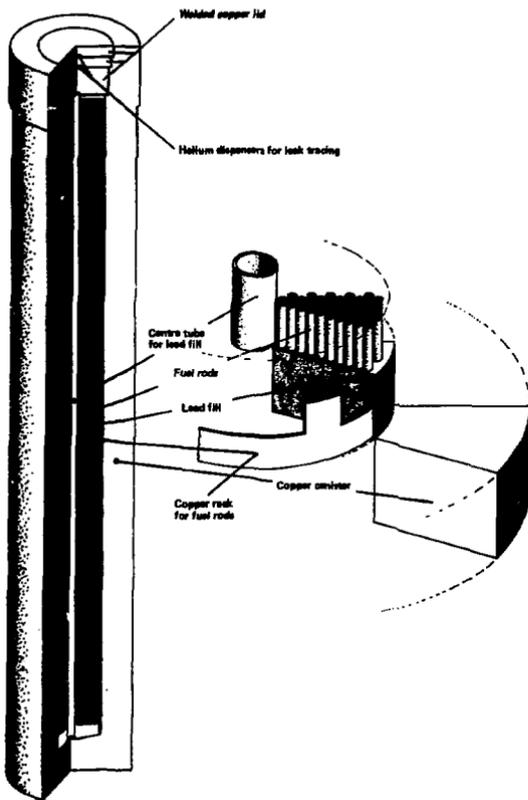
Cutaway drawing of copper canister filled with fuel rods. After dismantling of the fuel assemblies, the fuel rods are placed in a cylindrical rack whose perforated copper shell encloses the fuel rods. The filled rack is covered with a perforated lid and lowered into the canister. The center tube is used for lifting and lead casting.
